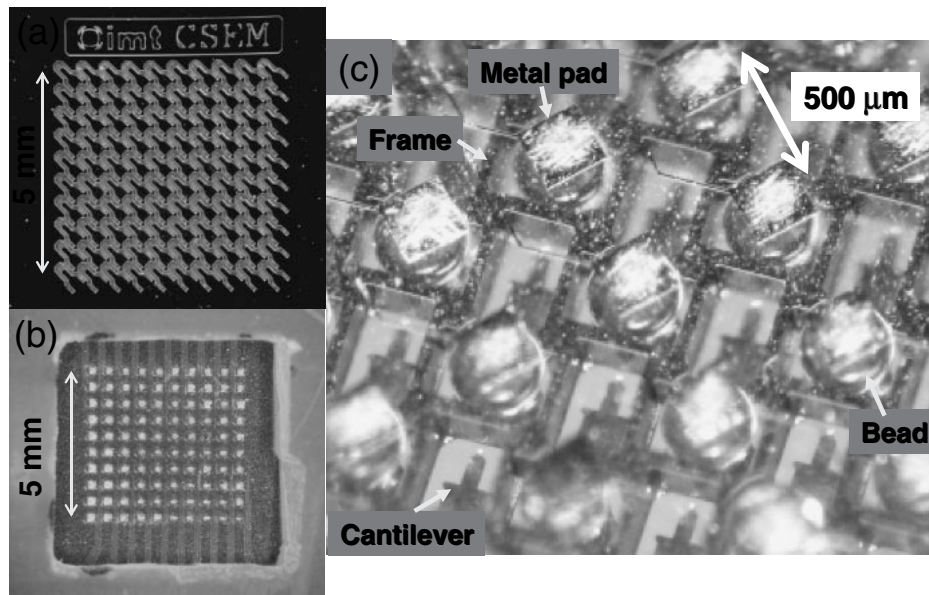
(a) Top view of  $10 \times 10$  probe array, (b) view from the back surface of the PCB, and (c) enlarged view of the probe array area showing the cantilevers and beads through Mylar film.
